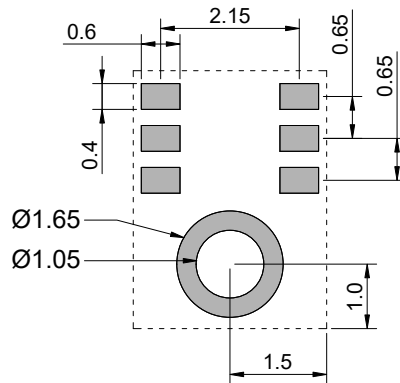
PCB solder pad layout for SDMO07C-26/1281
